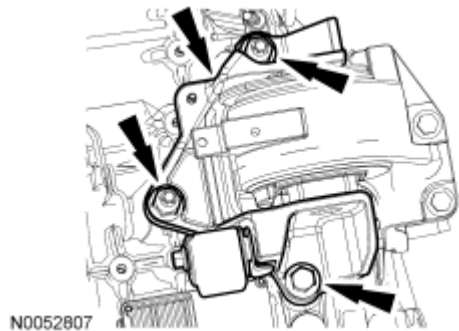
Locating Transaxle Support Insulator Bracket Nuts & Bolt
